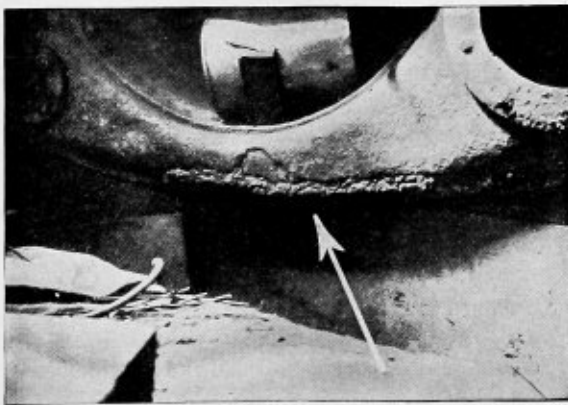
Boiler of Sarnia After Welding with Metallic Electrode
